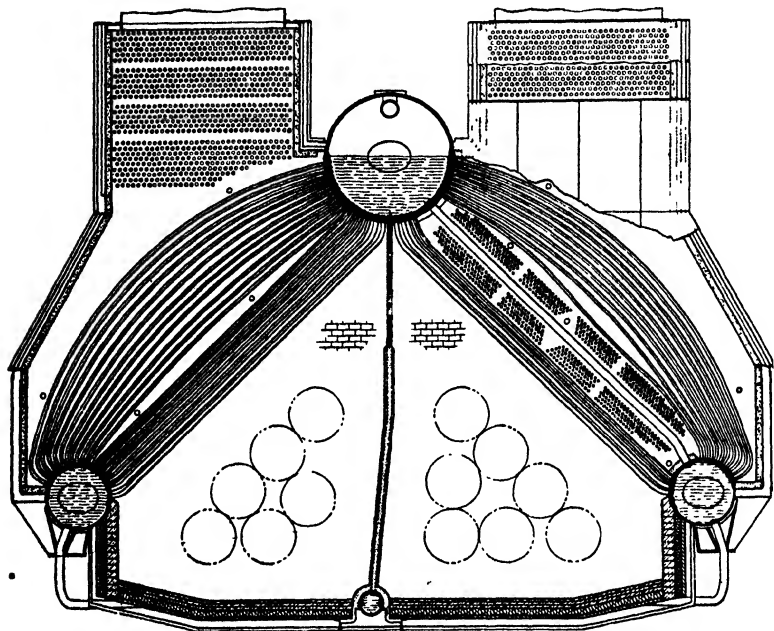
Babcock and Wilcox three-drum express boiler with divided furnace.
